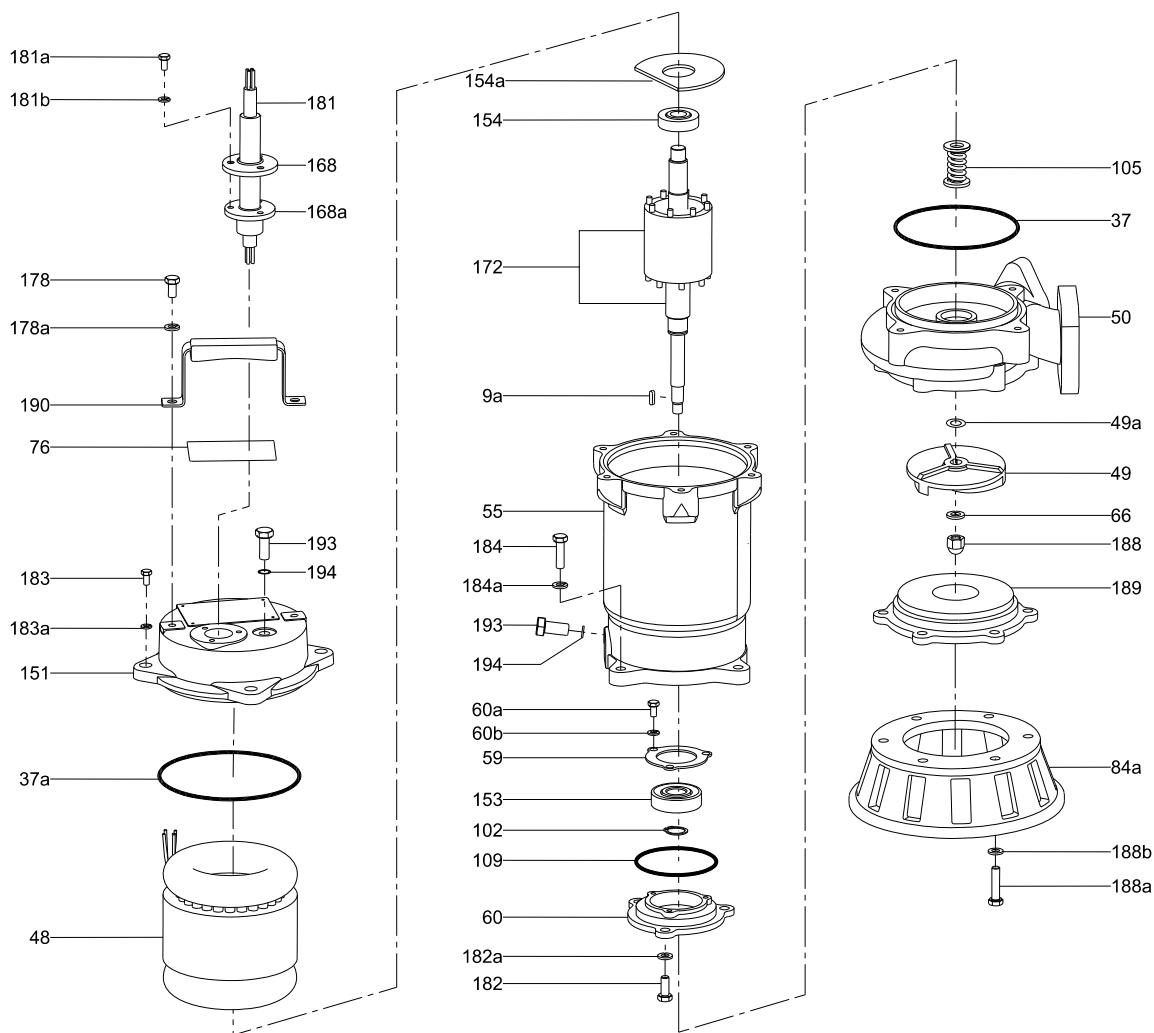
Exploded view DPK.10.50.075, DPK.10.50.15 and DPK.10.80.22
